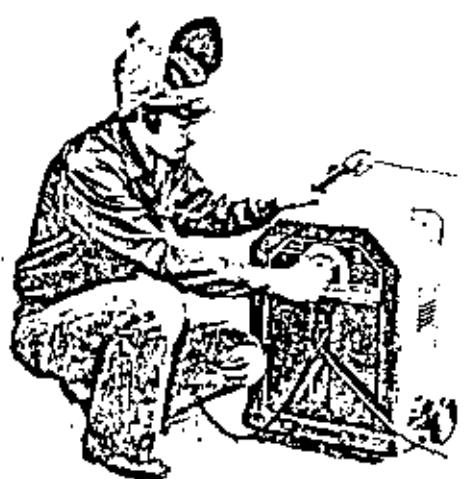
A typical small AC transformer welder for light-duty and limited-service welding
